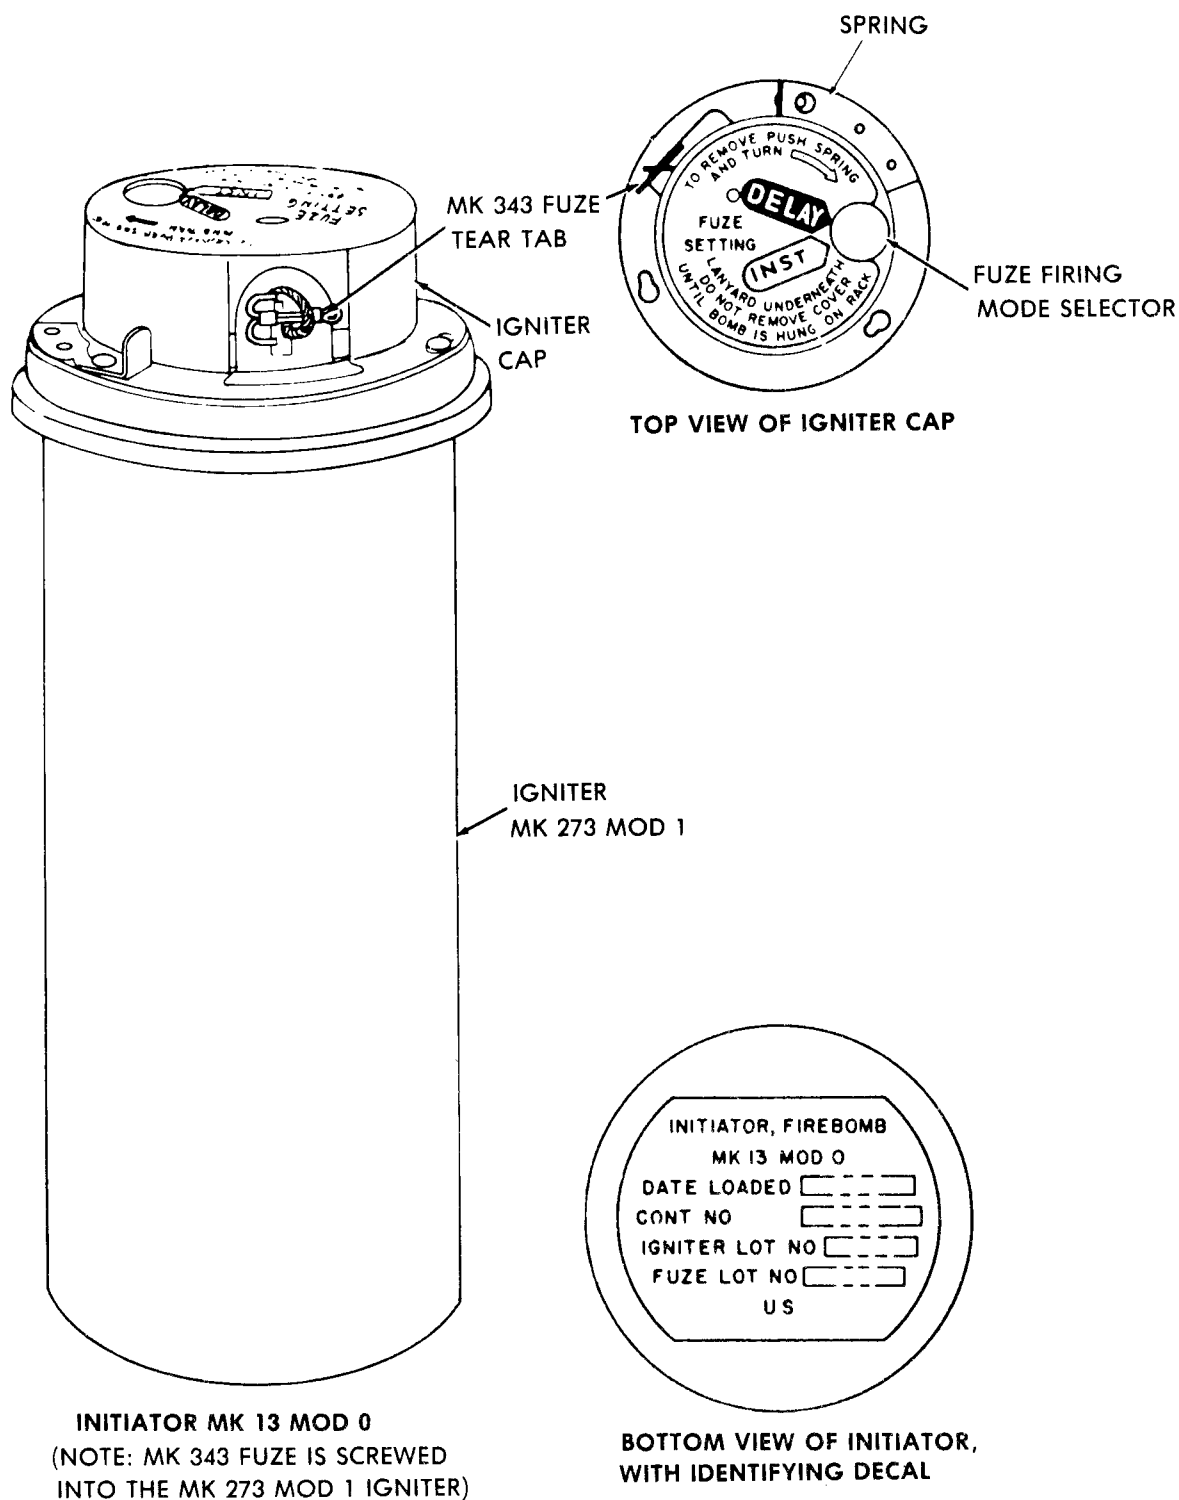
Fire Bomb Initiator MK 13 Mod 0 — External View
